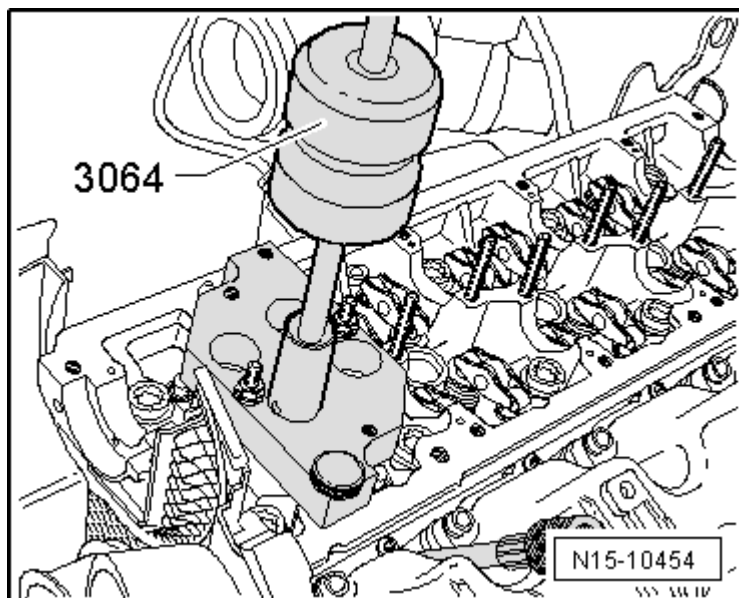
Identifying Tool 3064 And Punch VAS 5161/3
